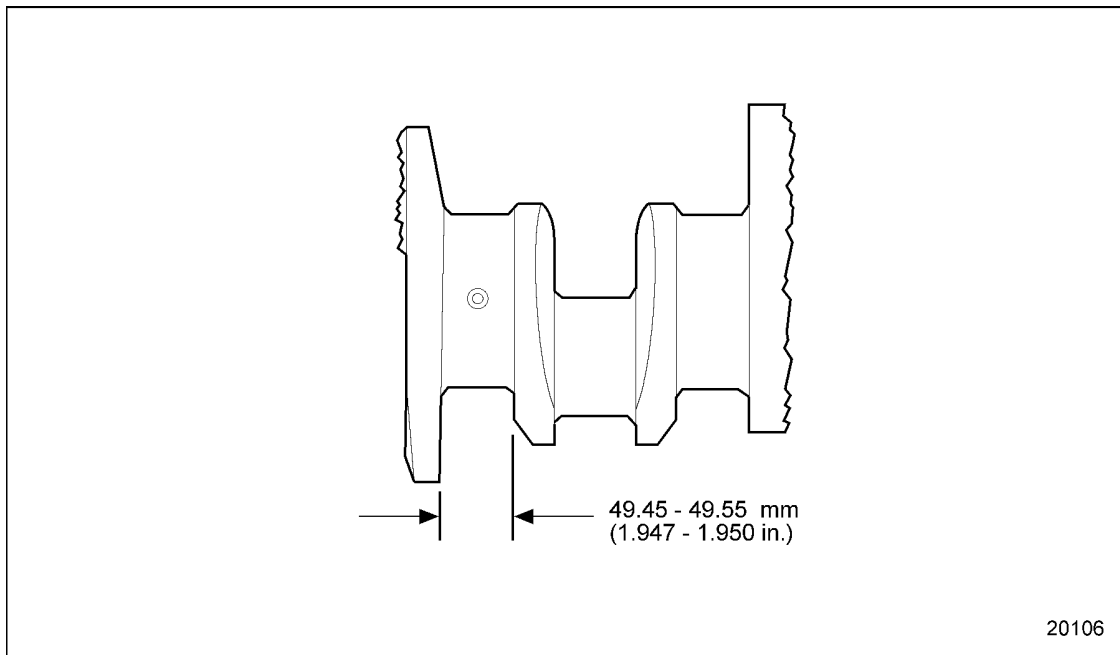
Standard Dimensions at No. 4 Main Bearing Thrust Washers
